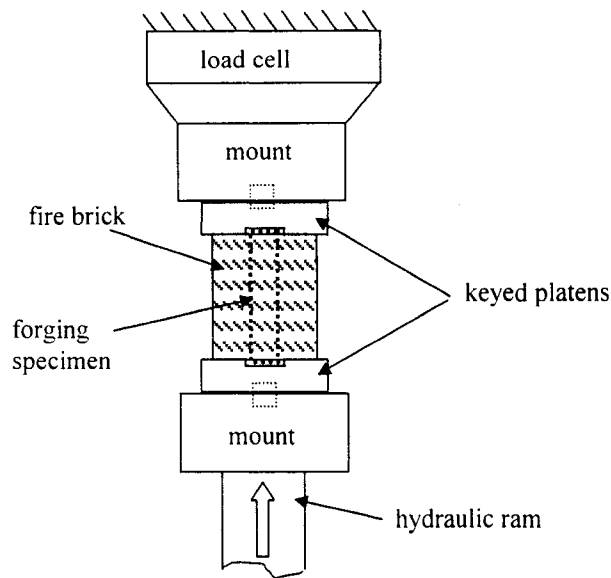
Schematic for the hot forging of a $\text{Fe}_{83}\text{Ga}_{17}$ cast rod (89-mm diameter, 54-mm long) using a hydraulic MTS machine.
